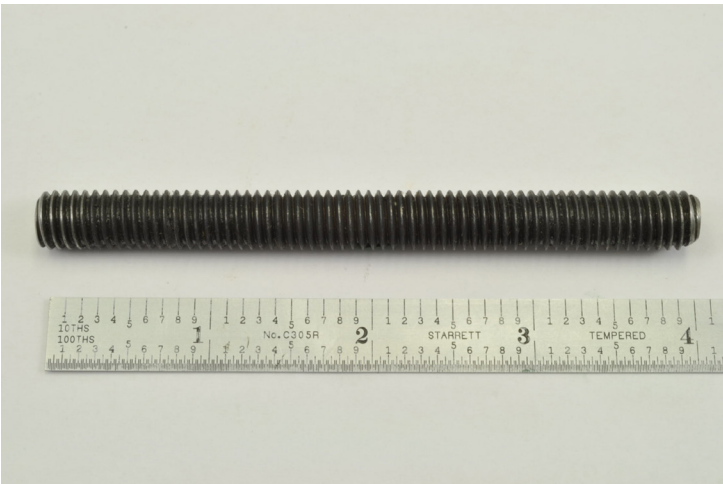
HCF Specimen Sectioned from Standard B7 (4140) Steel UNC 3/8 in.-16 Threaded Rod
